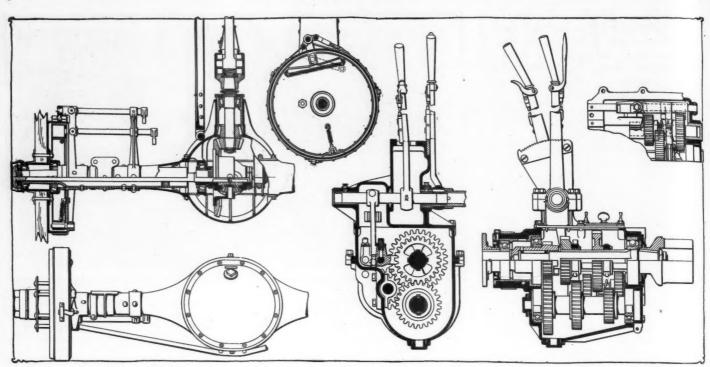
SECTIONAL VIEWS SHOWING DETAILS OF SERIES V NATIONAL'S REAR AXLE AND CHANGE-SPEED GEARSET
